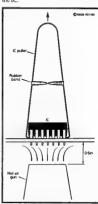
Using a hot sir gun with an integrated circuit puller.
